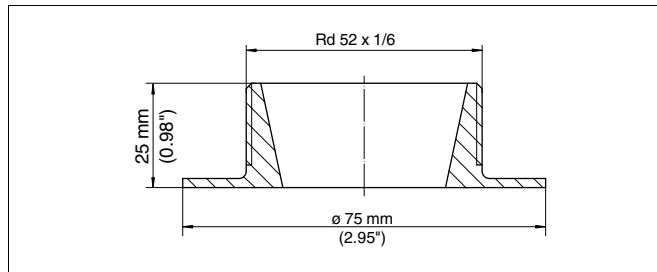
Dimensions welded socket conus connection DN 25
